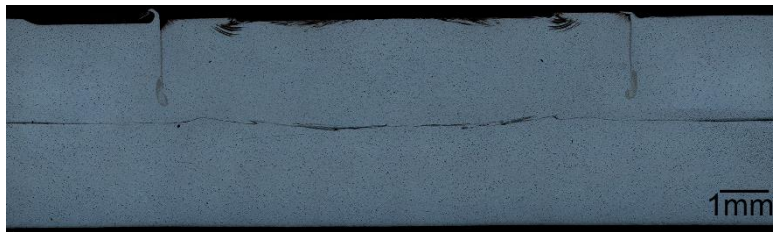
Similar AA5083 friction spot-welded joint. Welding condition: RS = 1200 rpm, PD = 1.6 mm, DT = 0.
